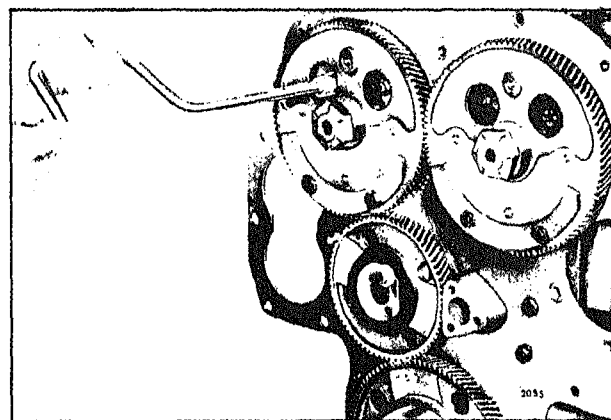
Removing or Installing Thrust Washer Retaining Bolts
